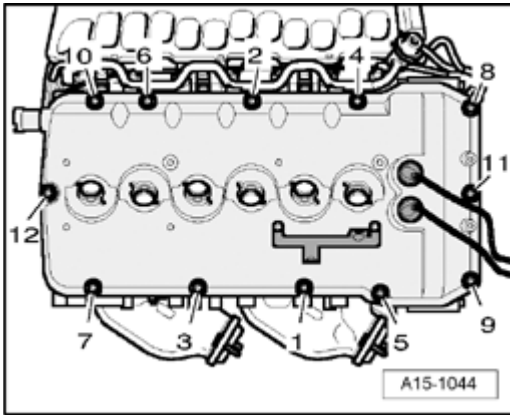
Left Cylinder Head Cover Bolts Sequence
